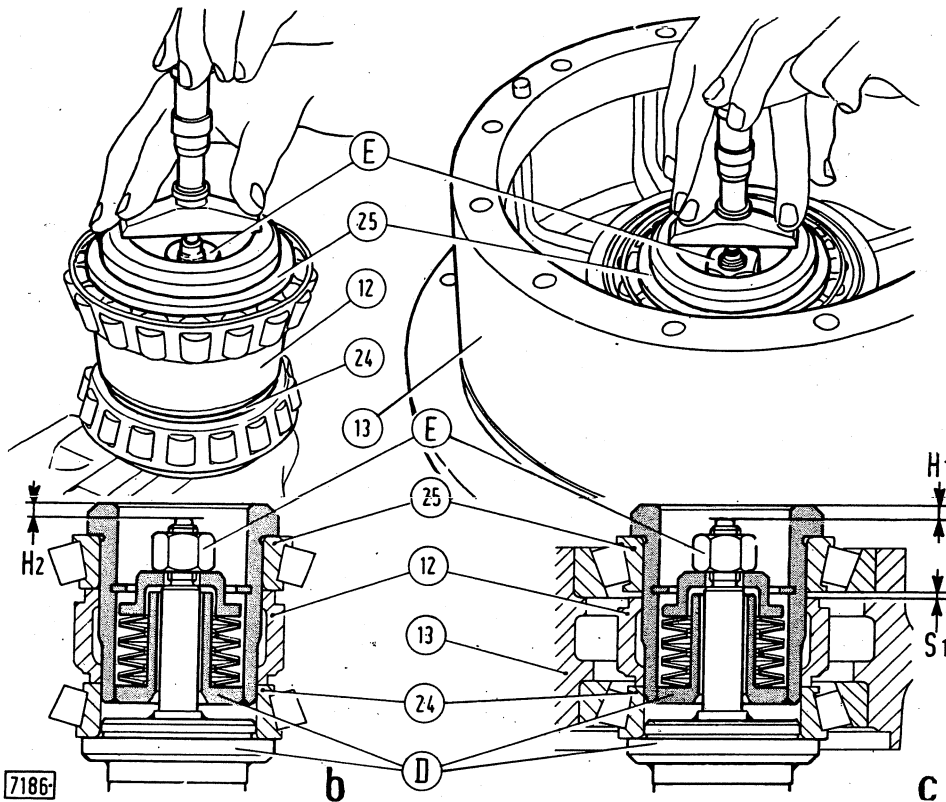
Finding correct shimming value (S_1 , Fig.5) for wheel hub bearings using the special adaptor D 292500 (292505).
